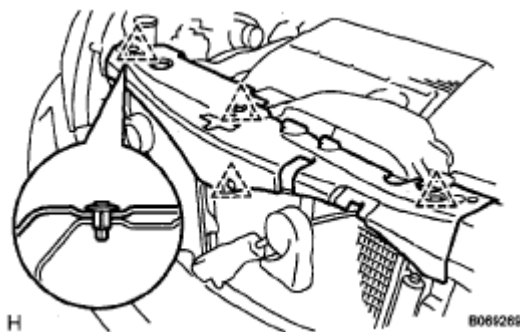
Identifying Cool Air Intake Duct Seal Clips
